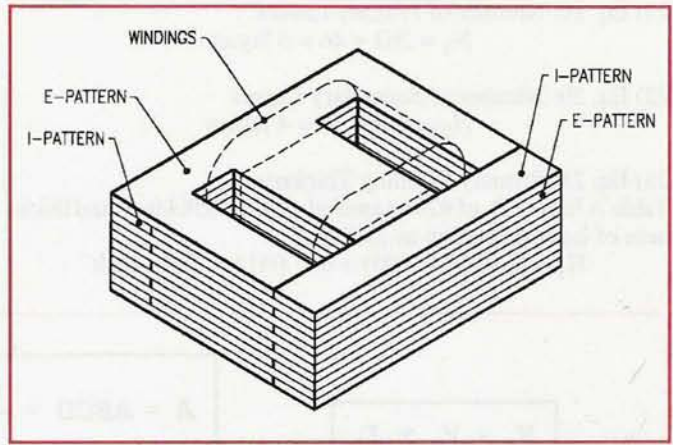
Transformer core stack assembly, using the "E" and "I" shaped metal pieces cut from the blanks shown in figure 1.
